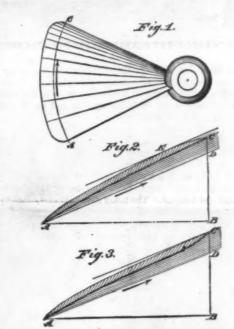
Section showing the modern method of sharpening propeller wheel blades. Fig. 3.—Section showing Pearson's method of sharpening wheel blades. Patented February 19, 1884.
